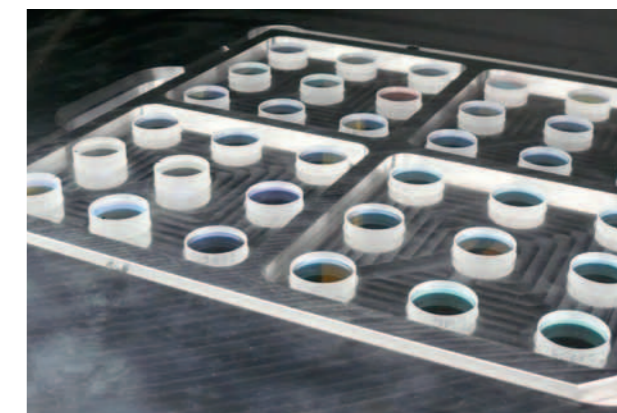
Laser mirrors are placed in a special holder magazine for automated defect inspection at LAYERTEC.
